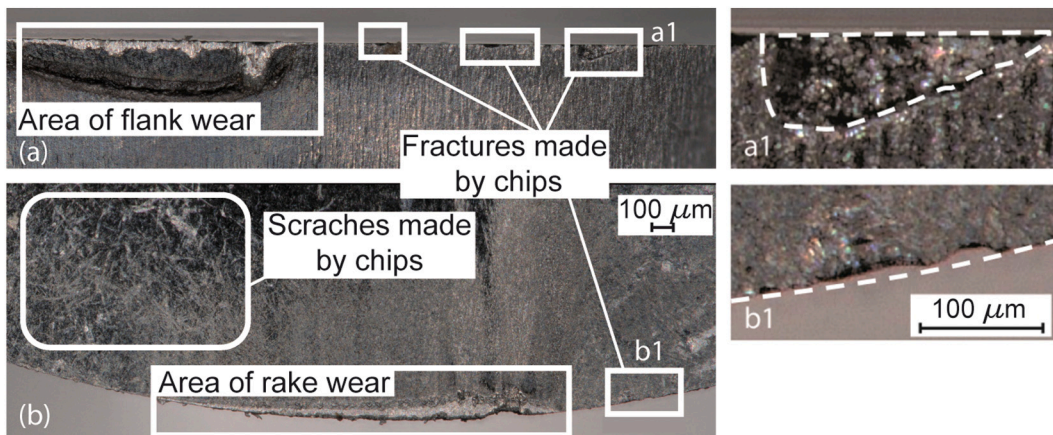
Damages on the indexable insert caused by HPC and chips under 140 bars: (a) flank surface, (b) rake surface
